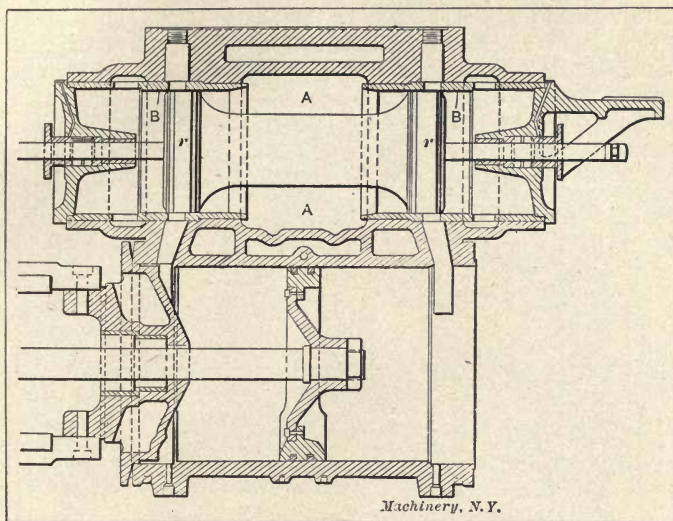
Sectional View of Cylinder and Steam Chest with Piston Valve
